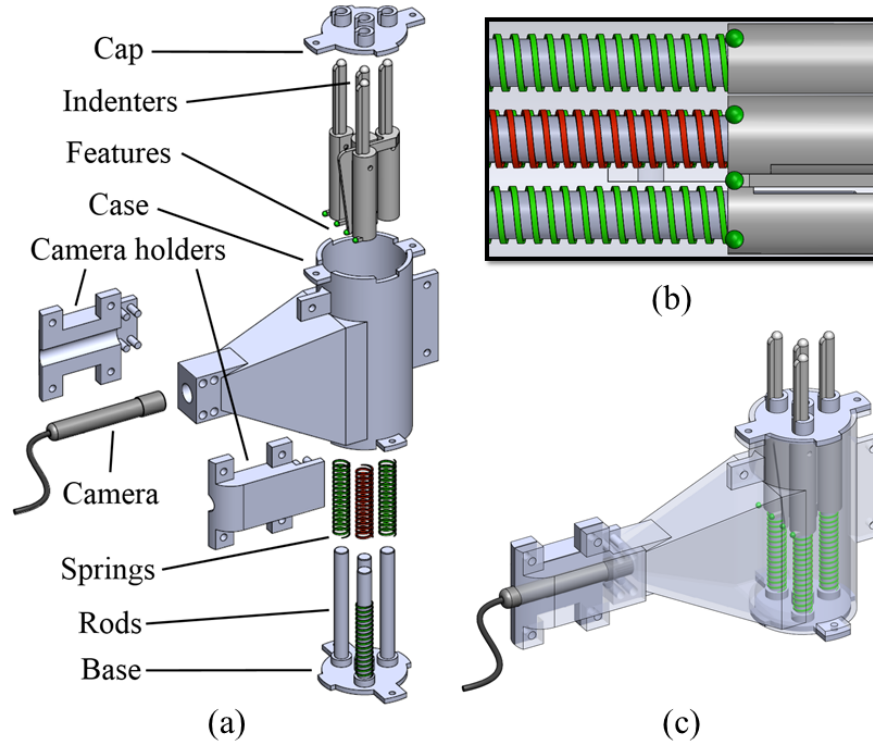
CAD Drawing of the stiffness probe showing in green the softer springs and in red the stiffer : (a) Exploded View, (b) Camera View and (c) Assembled.
